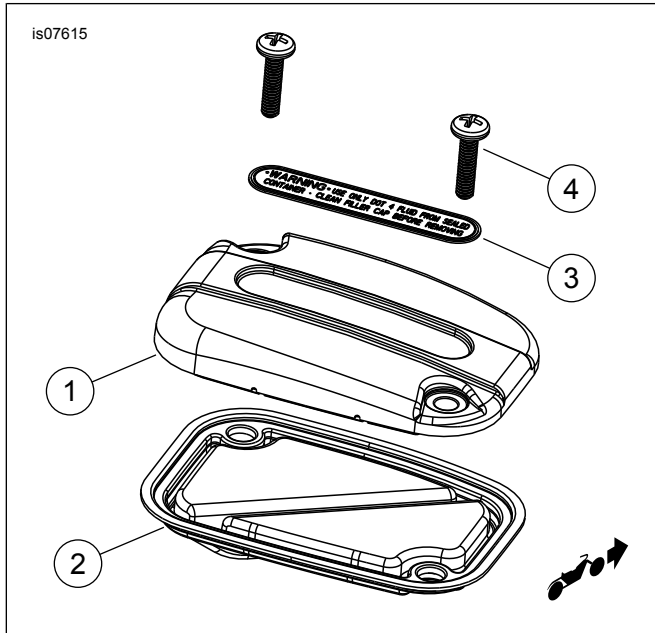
Service Parts: Clutch Master Cylinder Cover Kit
